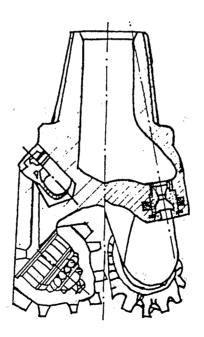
Assembly Drawing of SEOPJN in Roller Bit
